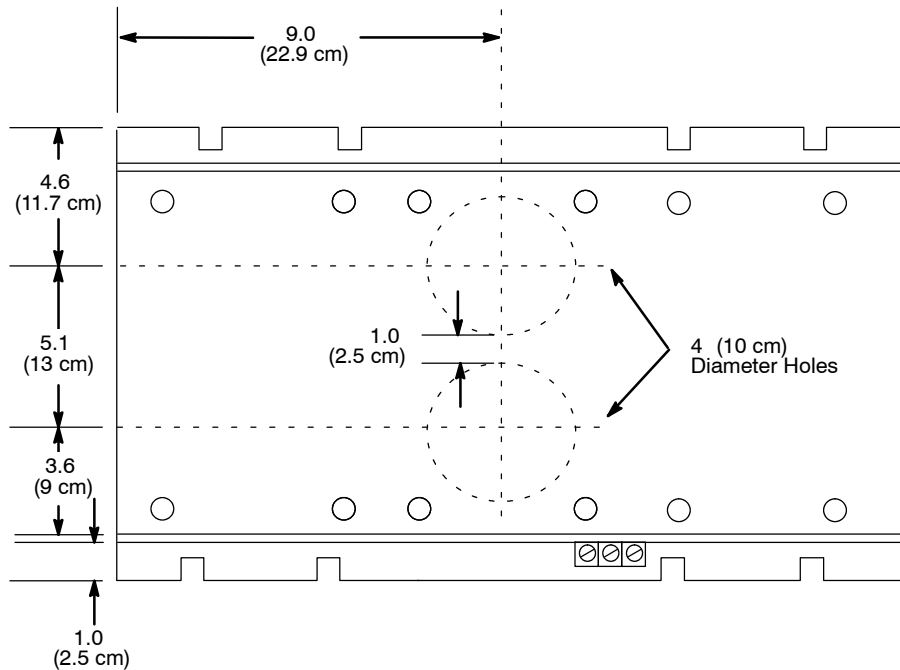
Dimensions to locate Optional Fan Holes on CL1060 Drive Mounting Plate
